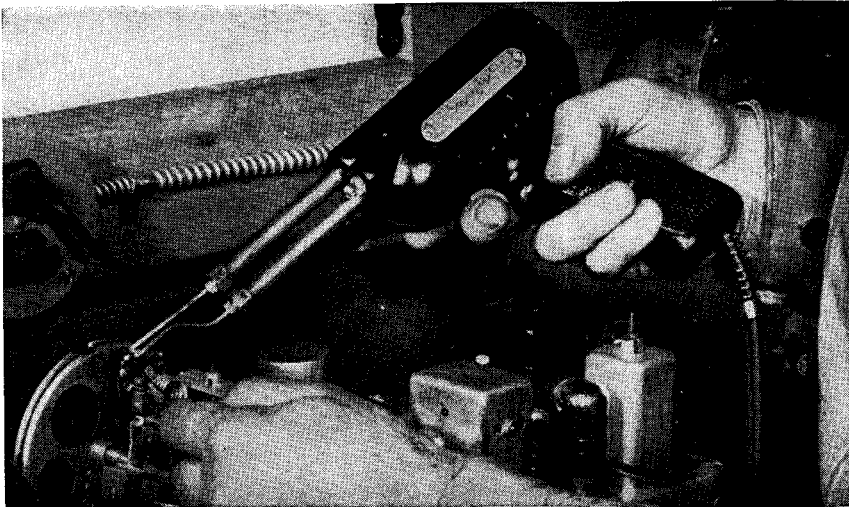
Using a Weller soldering gun for unsoldering the leads of a defective part in a radio receiver. Spotlight bulb on gun throws needed light directly on joint. (GE photo)
